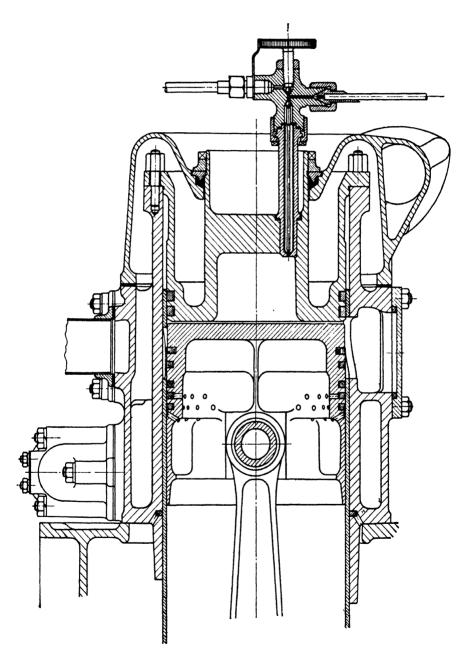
Combustion chamber of sleeve-valve C.I. engine
